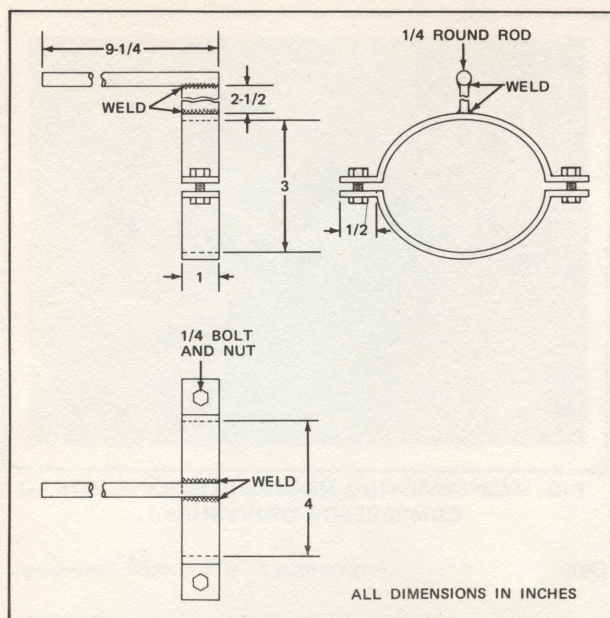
INDICATOR HOLDING FIXTURE FOR ALIGNING EQUIPMENT BLOWER WITH POWER TAKE-OFF SHAFT.
